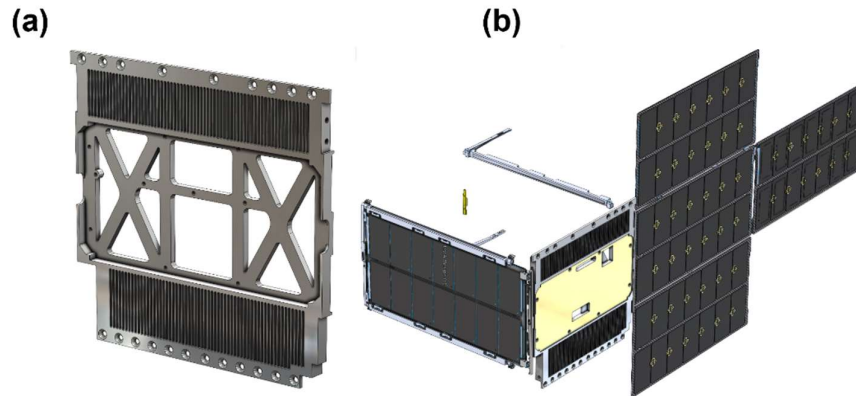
(a) Backplate rear view without the gimbal. (b) Backplate with mounted solar panels which are stowed and deployed along with gimbal
